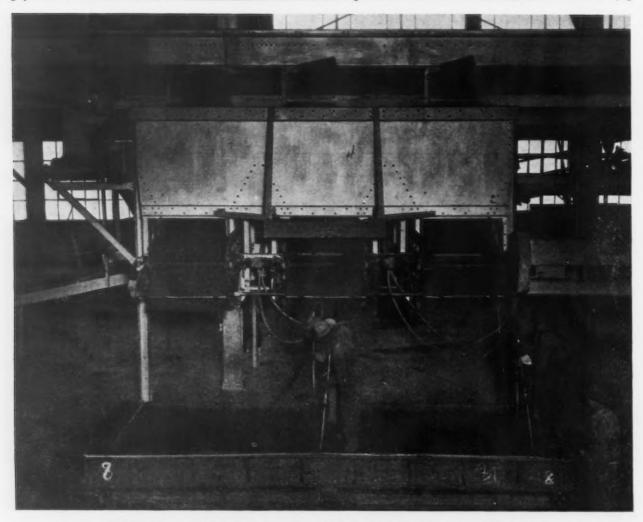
When the Jolt Ramming Machine Has Finished Its Work, Ramming of the Mold Is Completed with Pneumatic Rammers. This shows four workmen at the mold, which, in this instance, held four 16-ft. lengths of 8-in. pipe
